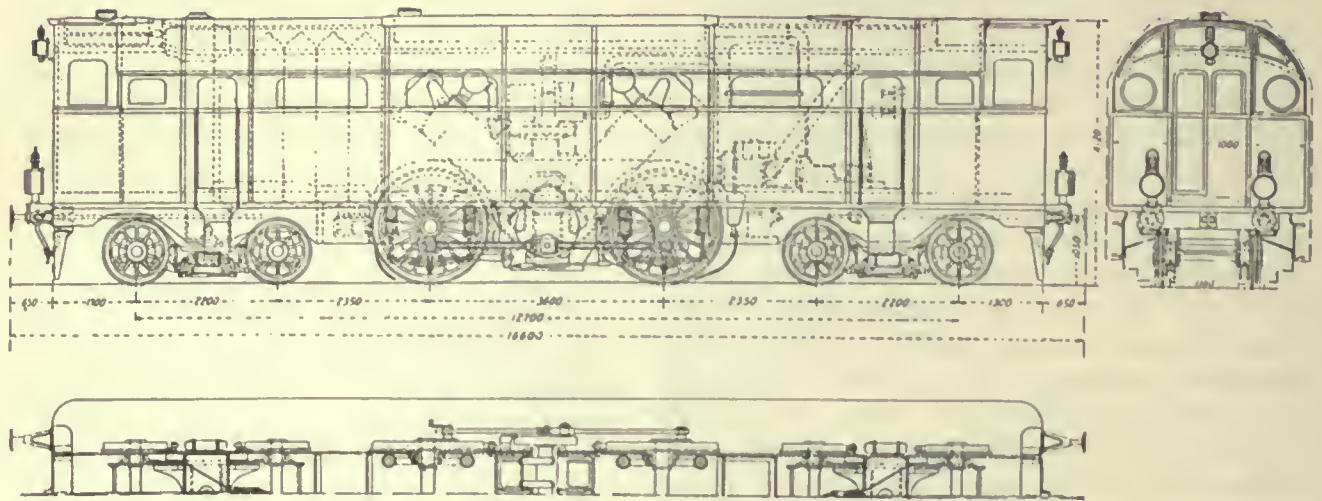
PRINCIPAL DIMENSIONS OF THE DIESEL LOCOMOTIVE
